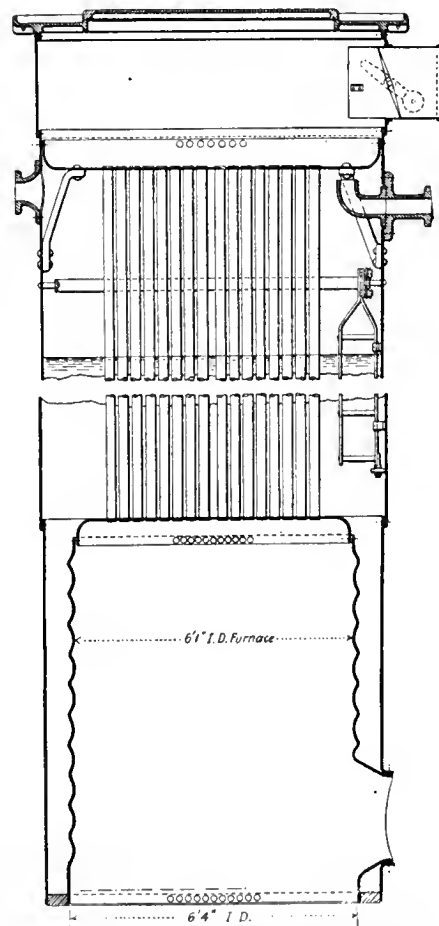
LARGER BOILER OF THIS DESIGN WITH INTERIOR ACCESSIBLE FOR INSPECTION.
